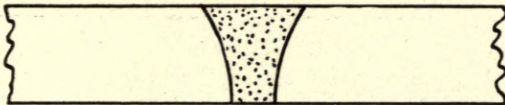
Diagram of Section of Weld in Sample No. 3
